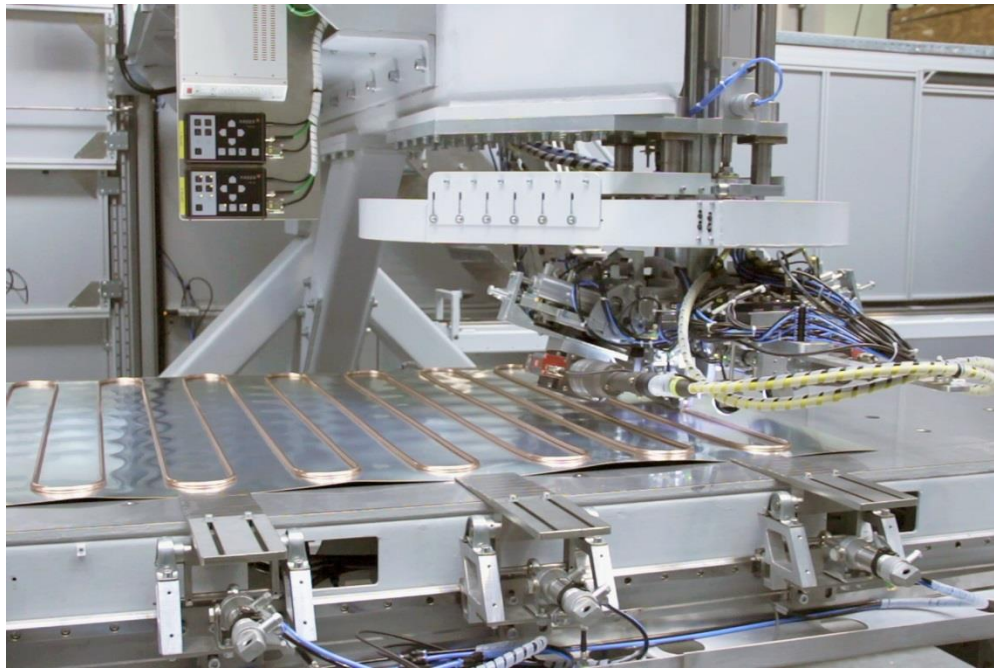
Automatised welding and assembly of the absorber [<http://www.tisun.com>]
